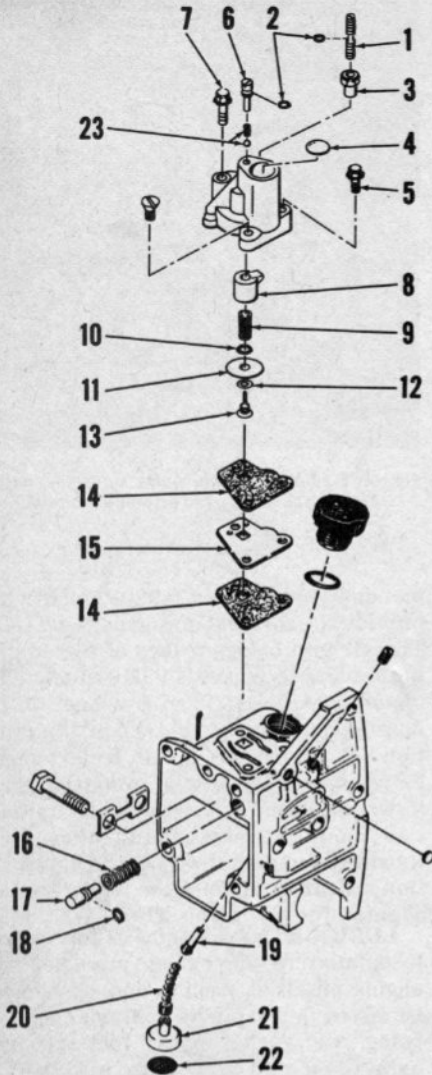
Exploded view of automatic chain oiler used on model 797. Oil pump used on models 440, 450, 550, 740, 790, 795, 795L, Super 797, 790, CP125, SP125, SP125C, PM105 and SP105 are similar.
